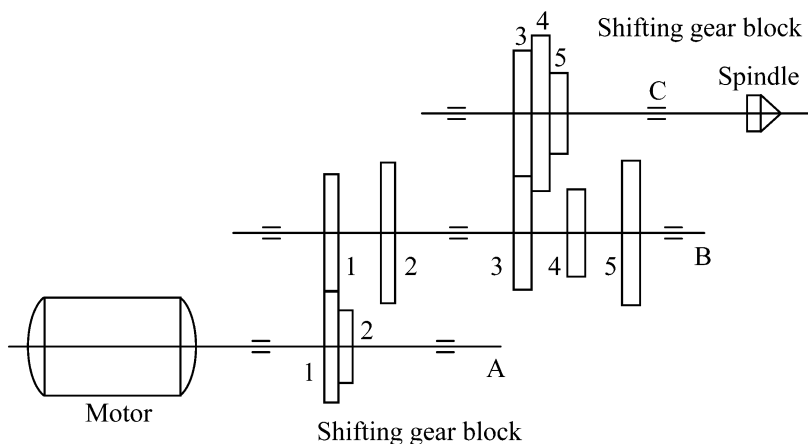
Gear box layout for the example problem of Figure 8.6
